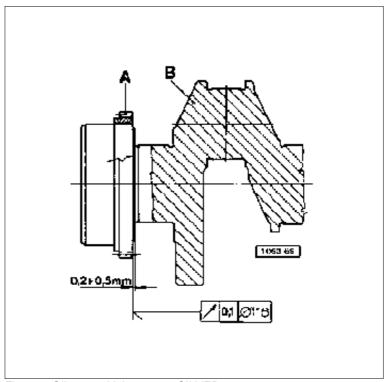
Oil pump driving gear - SILVER 100.6.
